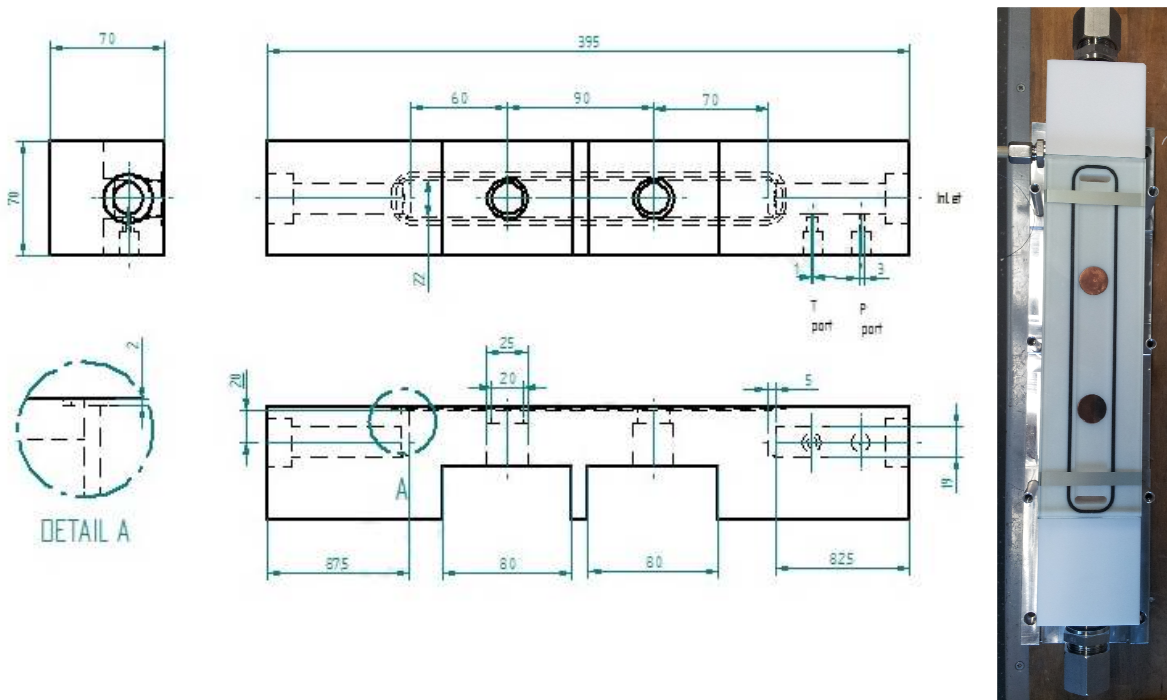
Sketch and picture of the test section. Dimension are in mm.
